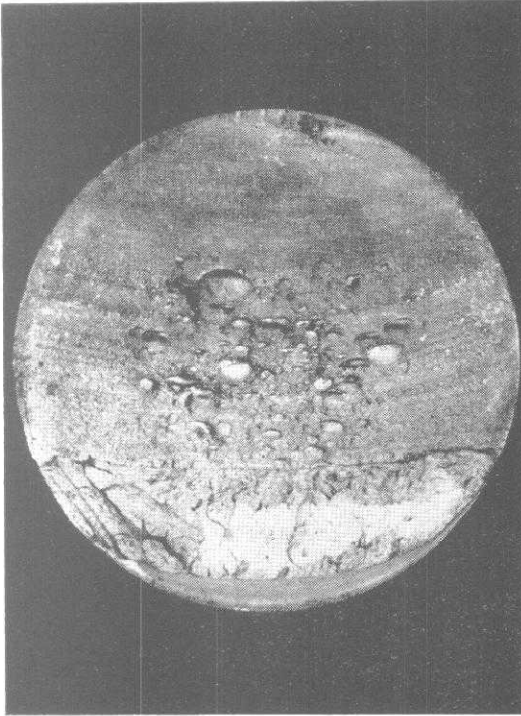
VIEW OF A FATIGUE FRACTURE IN A 10 IN. NICKEL-CHROMIUM-MOLYBDENUM SHAFT, SHOWING THE EFFECT OF HAIRLINE CRACKS
